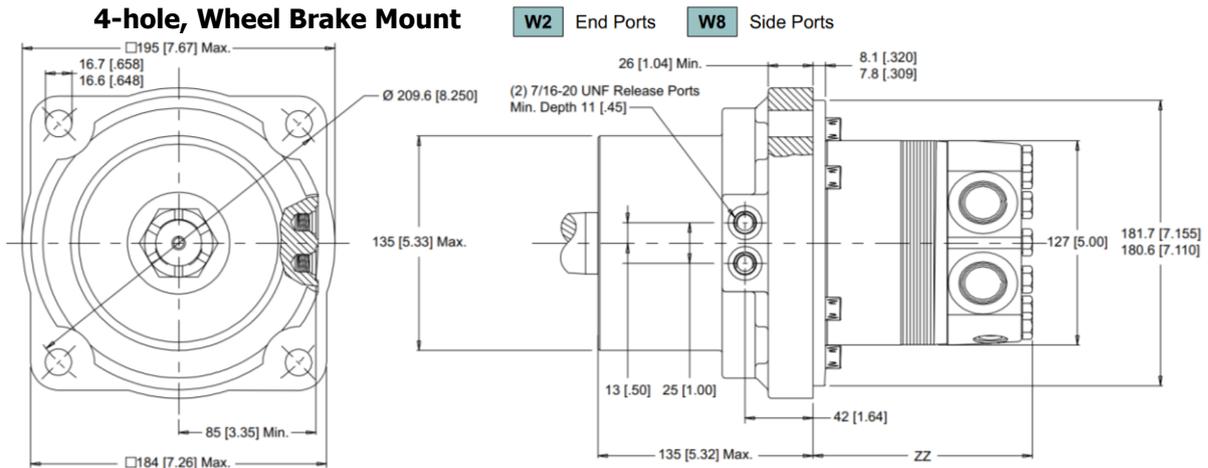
DR 610 Series, 4-hole Wheel Brake Mount
